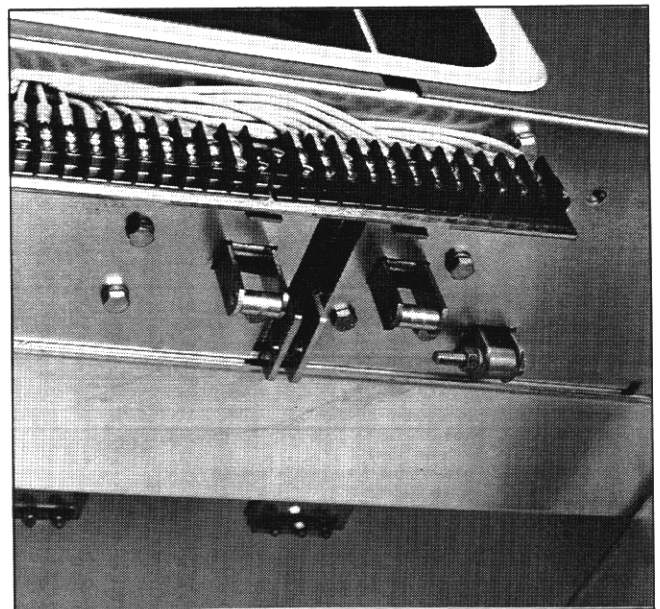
Series 29 Showing Bottom Accessed Interlocks and MOC Operator
